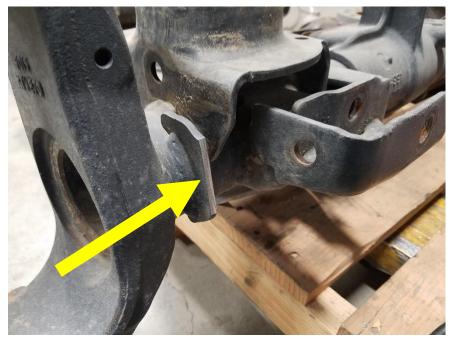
Removing Outer Passenger Side Sway Bar Tab
